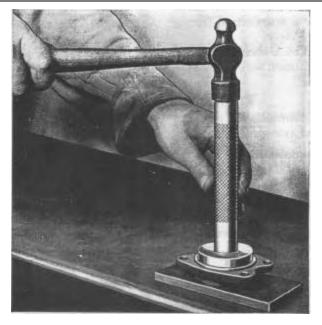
Replacing Bearing Cap Oil Seal—J-353-l Oil Seal Replacer
